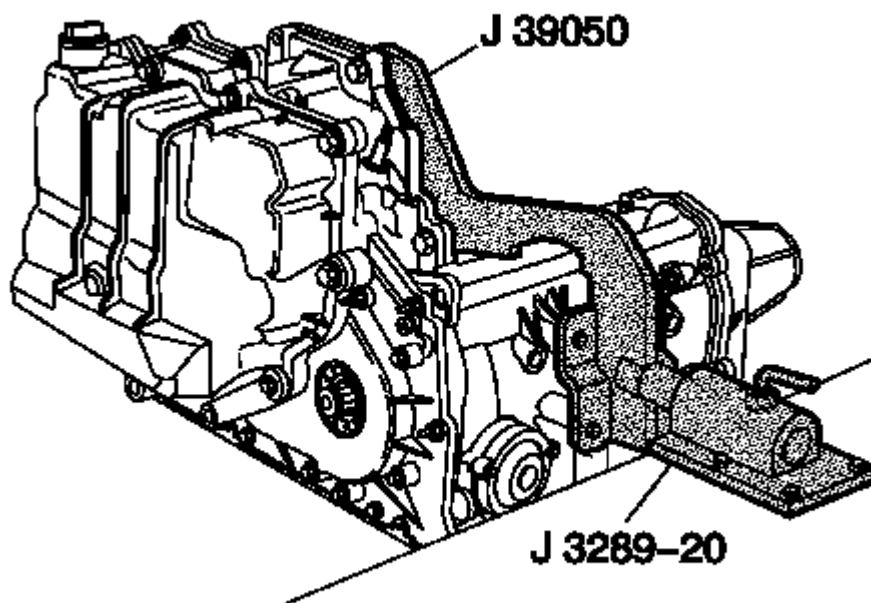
View Of J 39050 & J 3289-20 On Transmission
